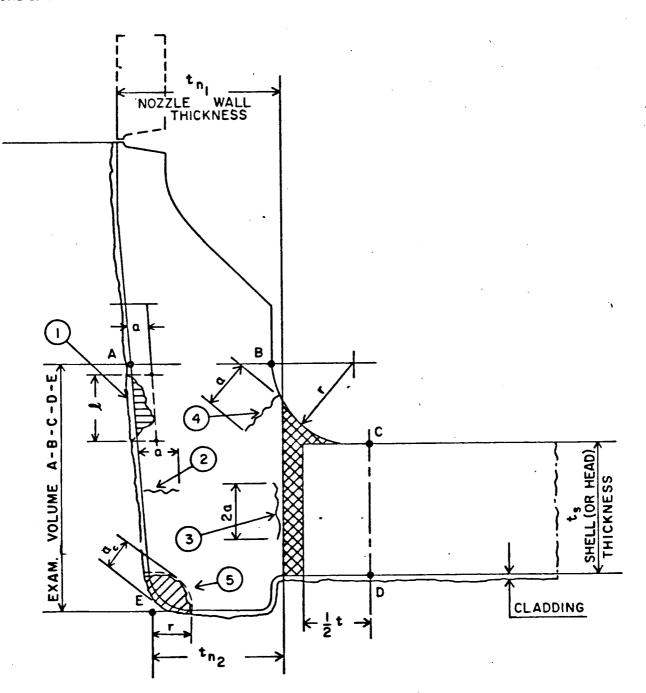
PIPE BRANCH CONNECTION
